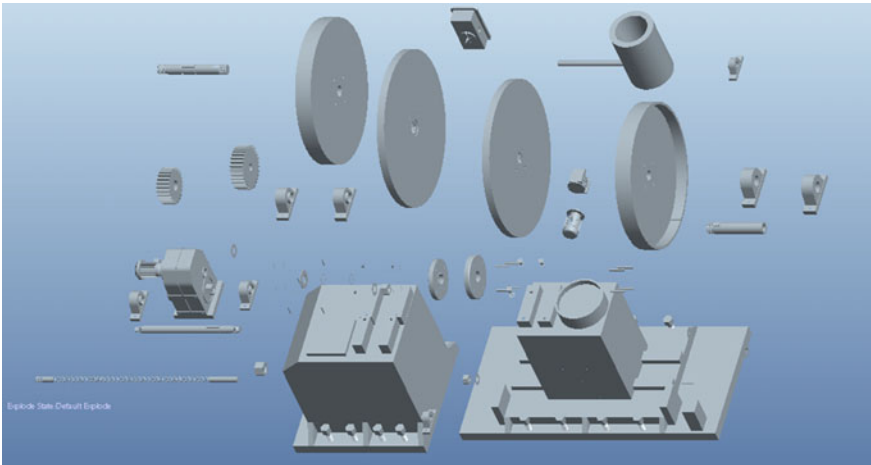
Exploded view of assembly of centrifugal casting equipment
